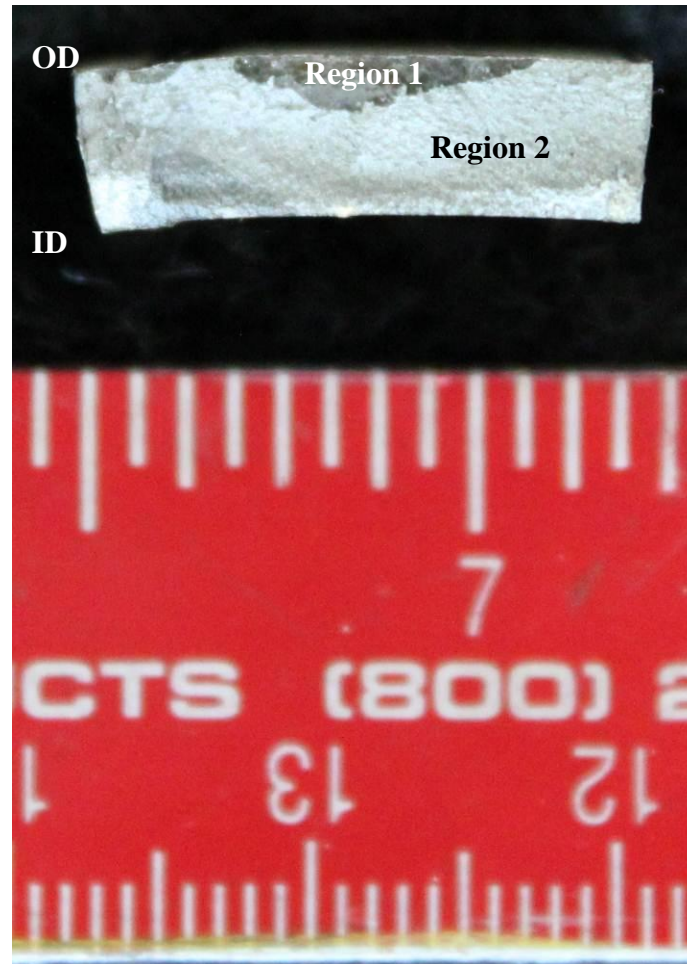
Photograph of the fracture surface from Crack Colony 10.
